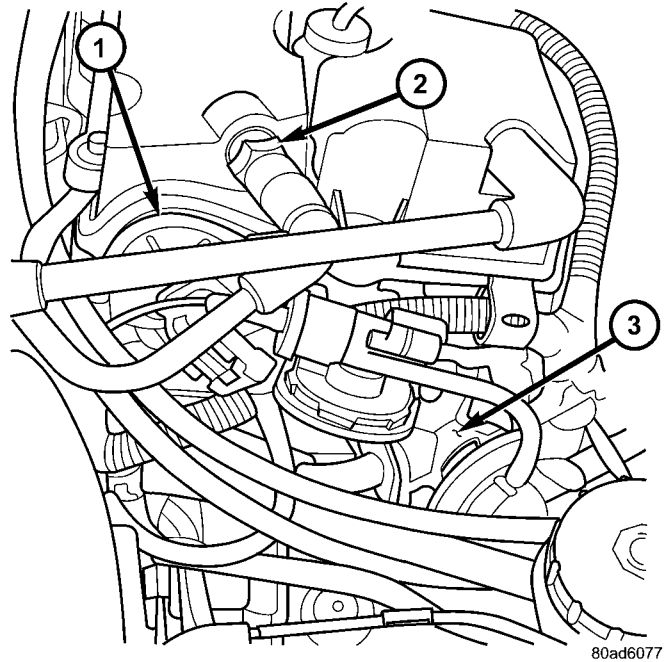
CAM SENSOR/EGR VALVE/PCV VALVE
